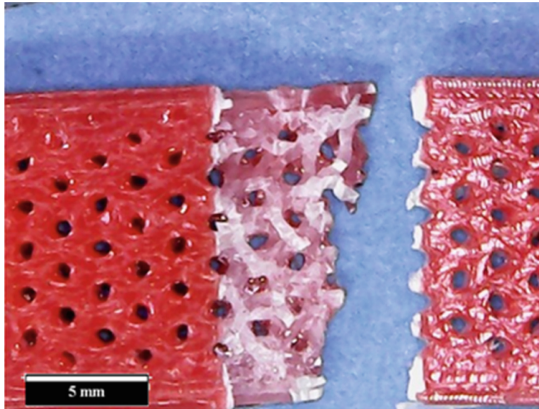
Fracture in test specimens with infill pattern type honeycomb
